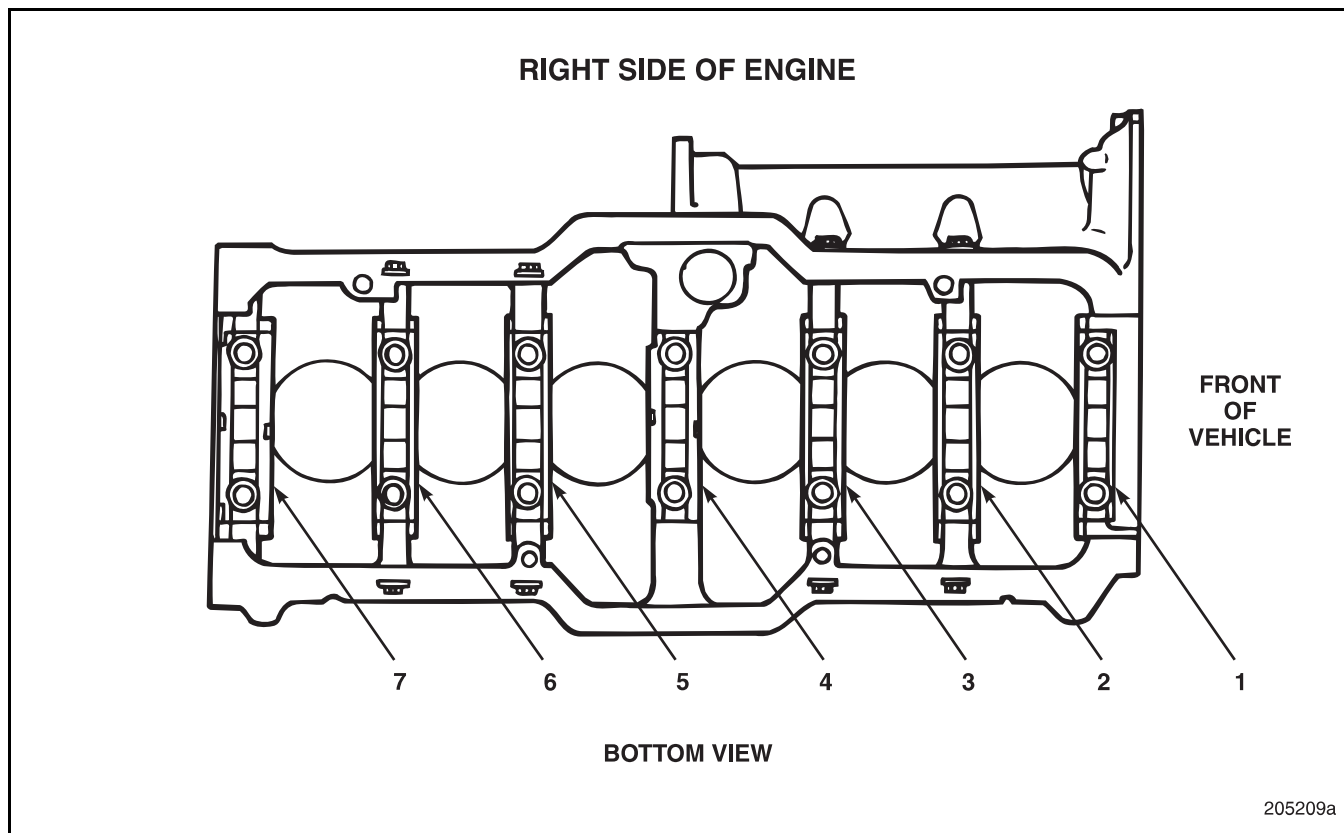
Main Bearing Insert Part Numbers and Locations
